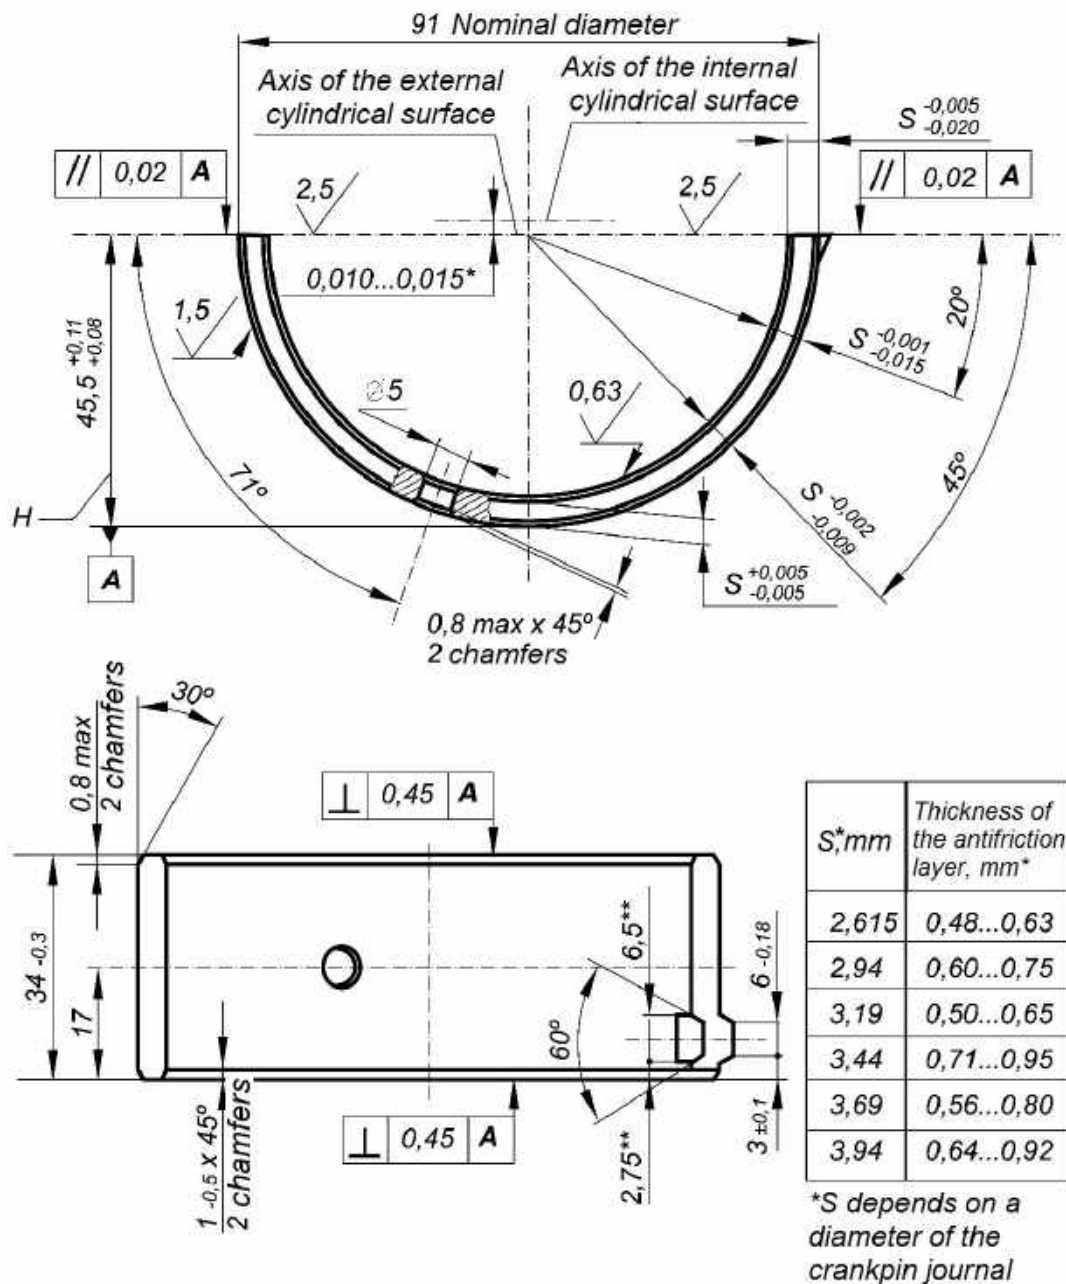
Fragment of the drawing of the crankpin bearing insert
